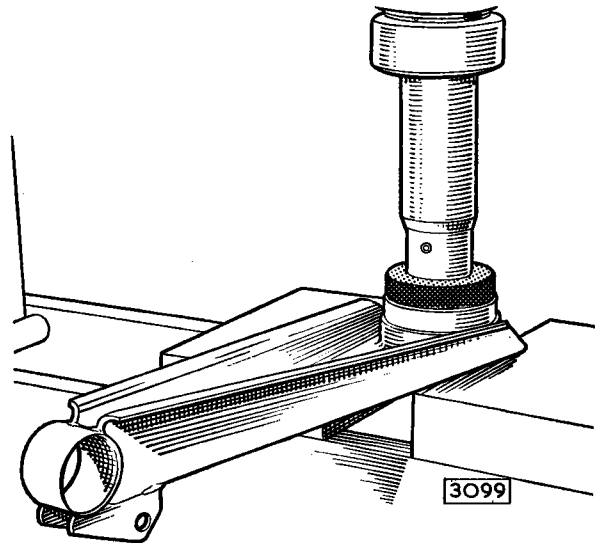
Showing removal of radius arm bushes (Churchill Tool No. J.21)
